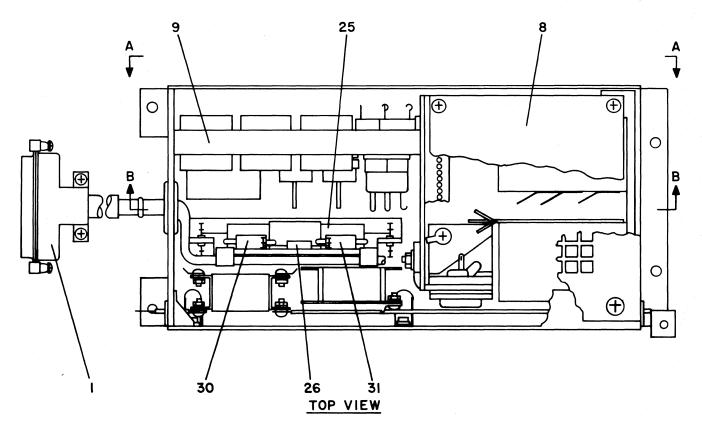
CONTROLLER PANEL ASSEMBLY (A1)
